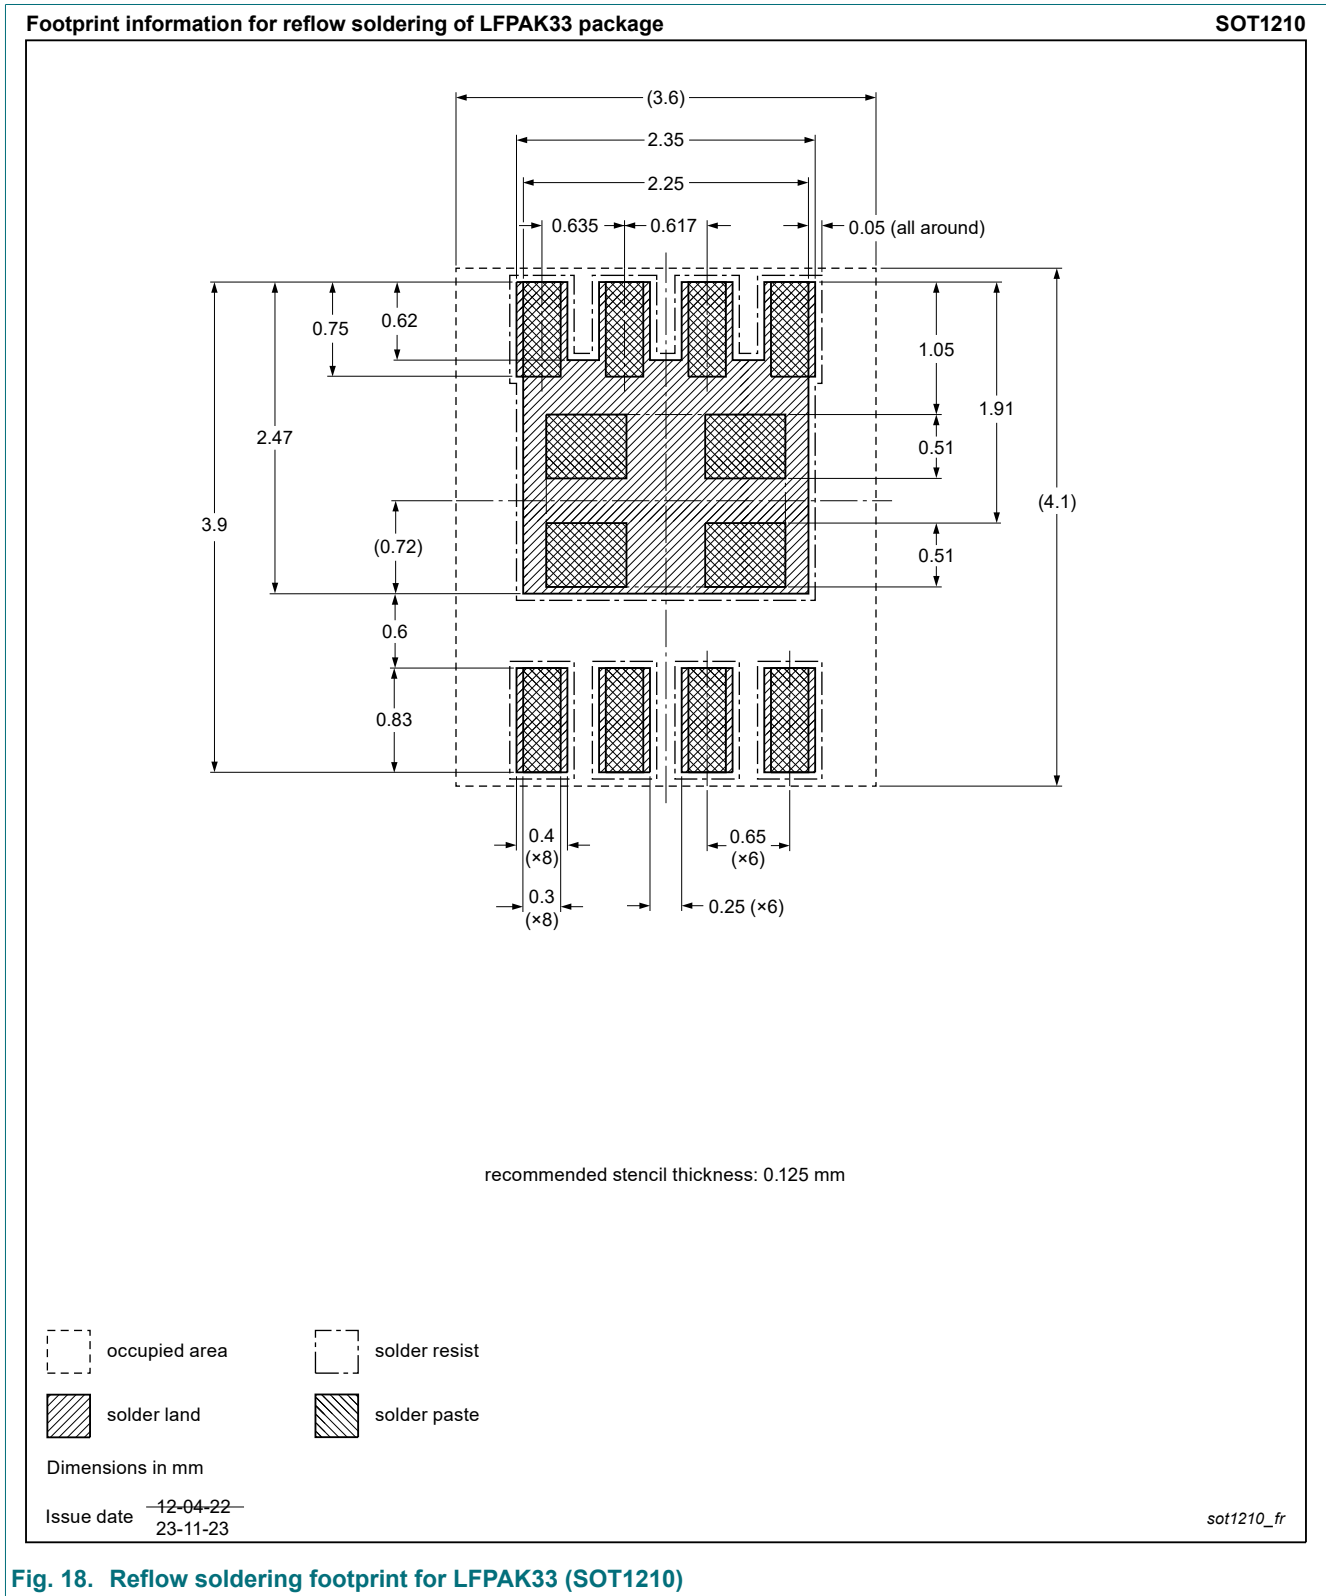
Reflow soldering footprint for LFPAK33 (SOT1210)
